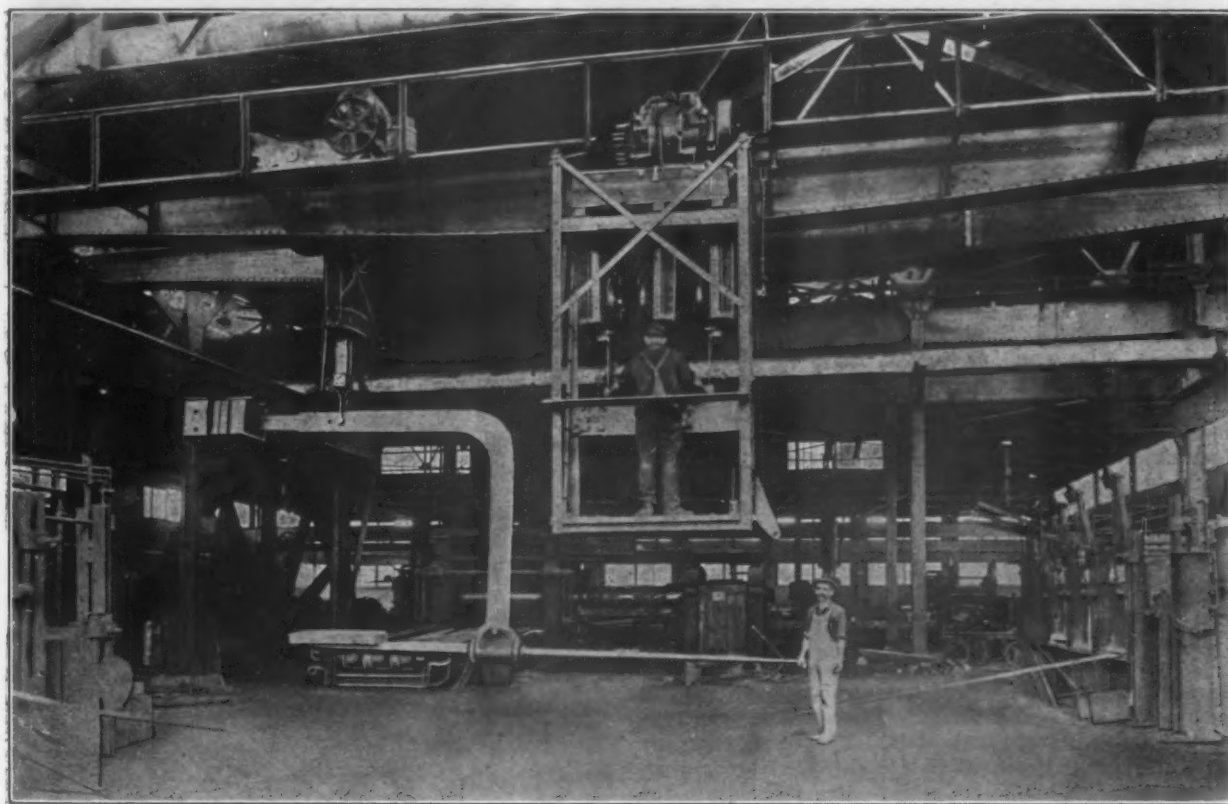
The Guss Furnace Peel in the 89-inch Mill.
